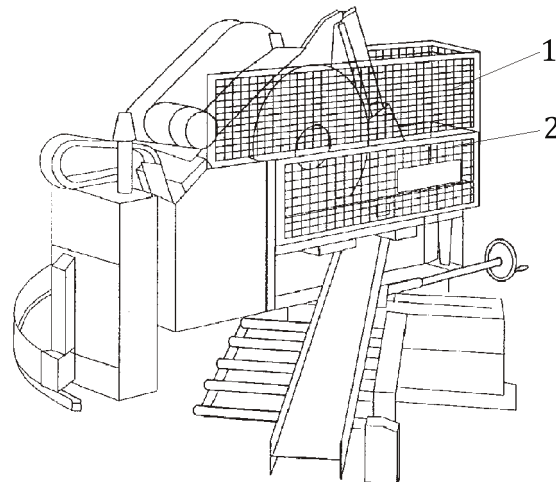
Example for guard on a circular sawing machine — Pivoting head type — Manual and power-operated cutting head feed
